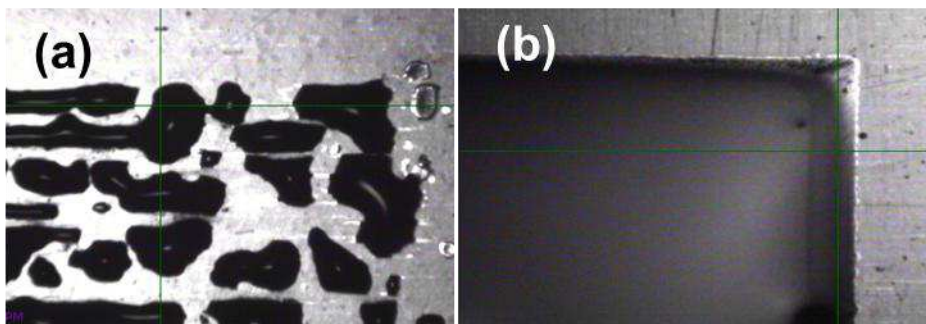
(a) printing with extremely bad wetting and (b) good wetting
